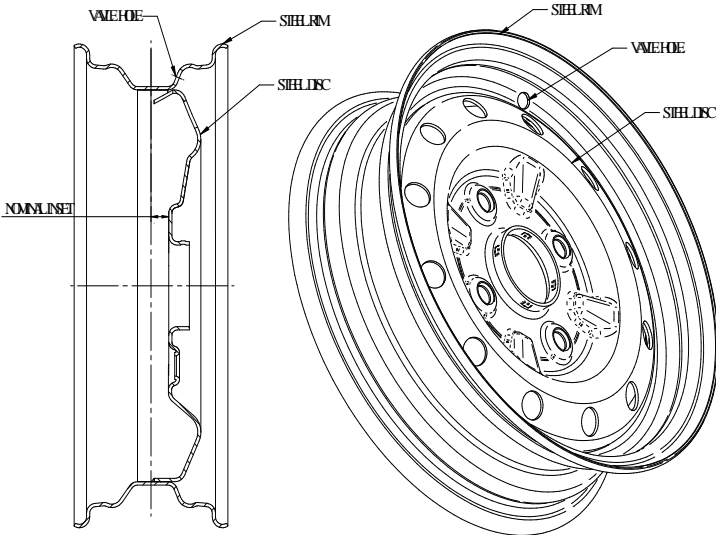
TYPICAL COMPOSITE CONSTRUCTION STEEL WHEEL RIM
